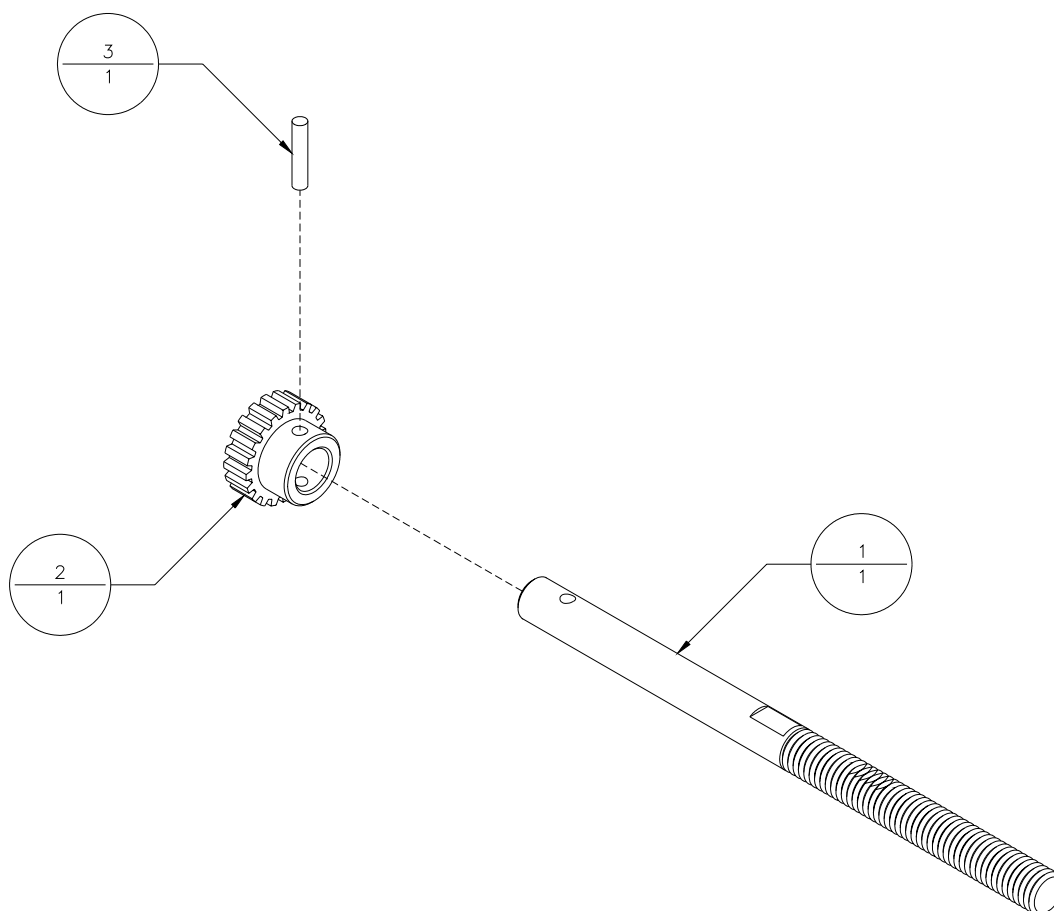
Height Adjustment Screw Assembly (100540A)
